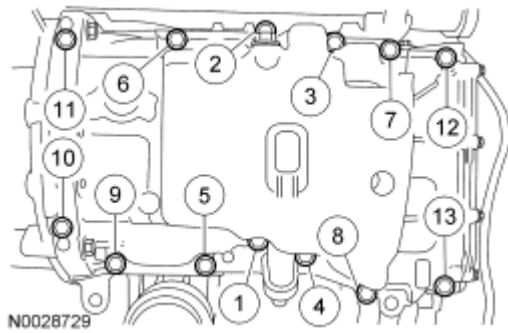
Identifying Tightening Sequence Of Oil Pan Bolts
